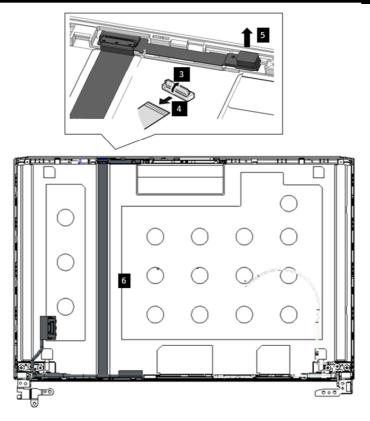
Disconnecting the eDP Cables FFC from Camera FPC Assembly
